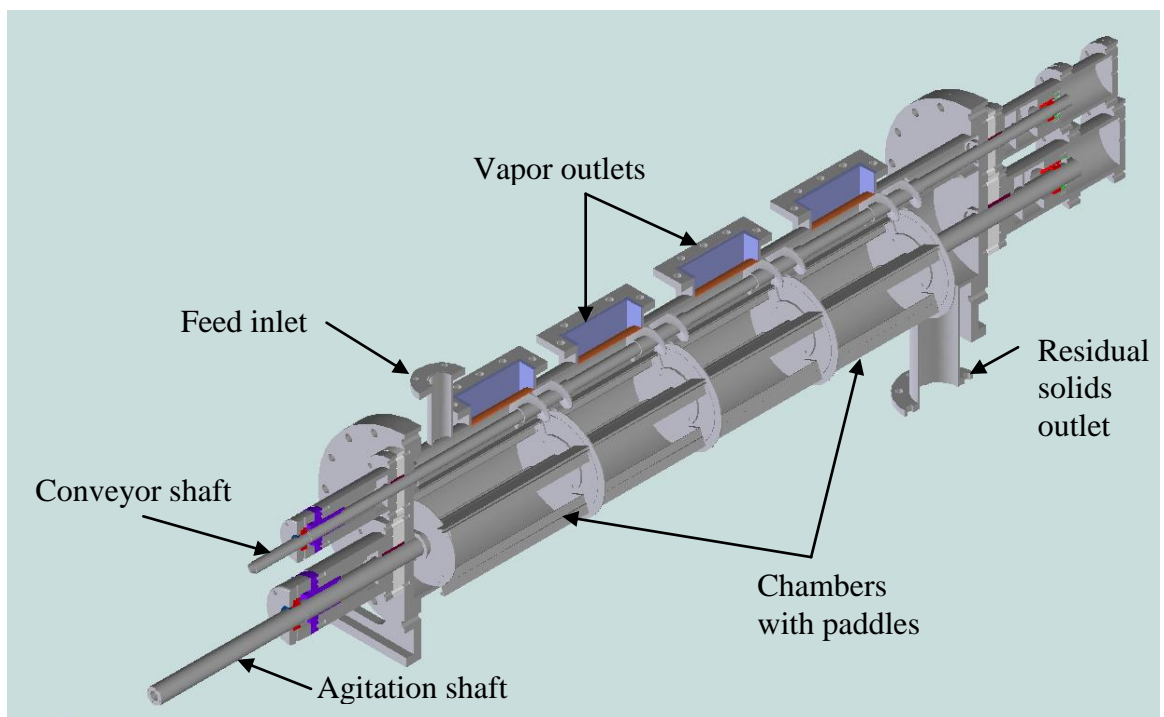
Double-shaft ketone reactor shown with four chambers.
